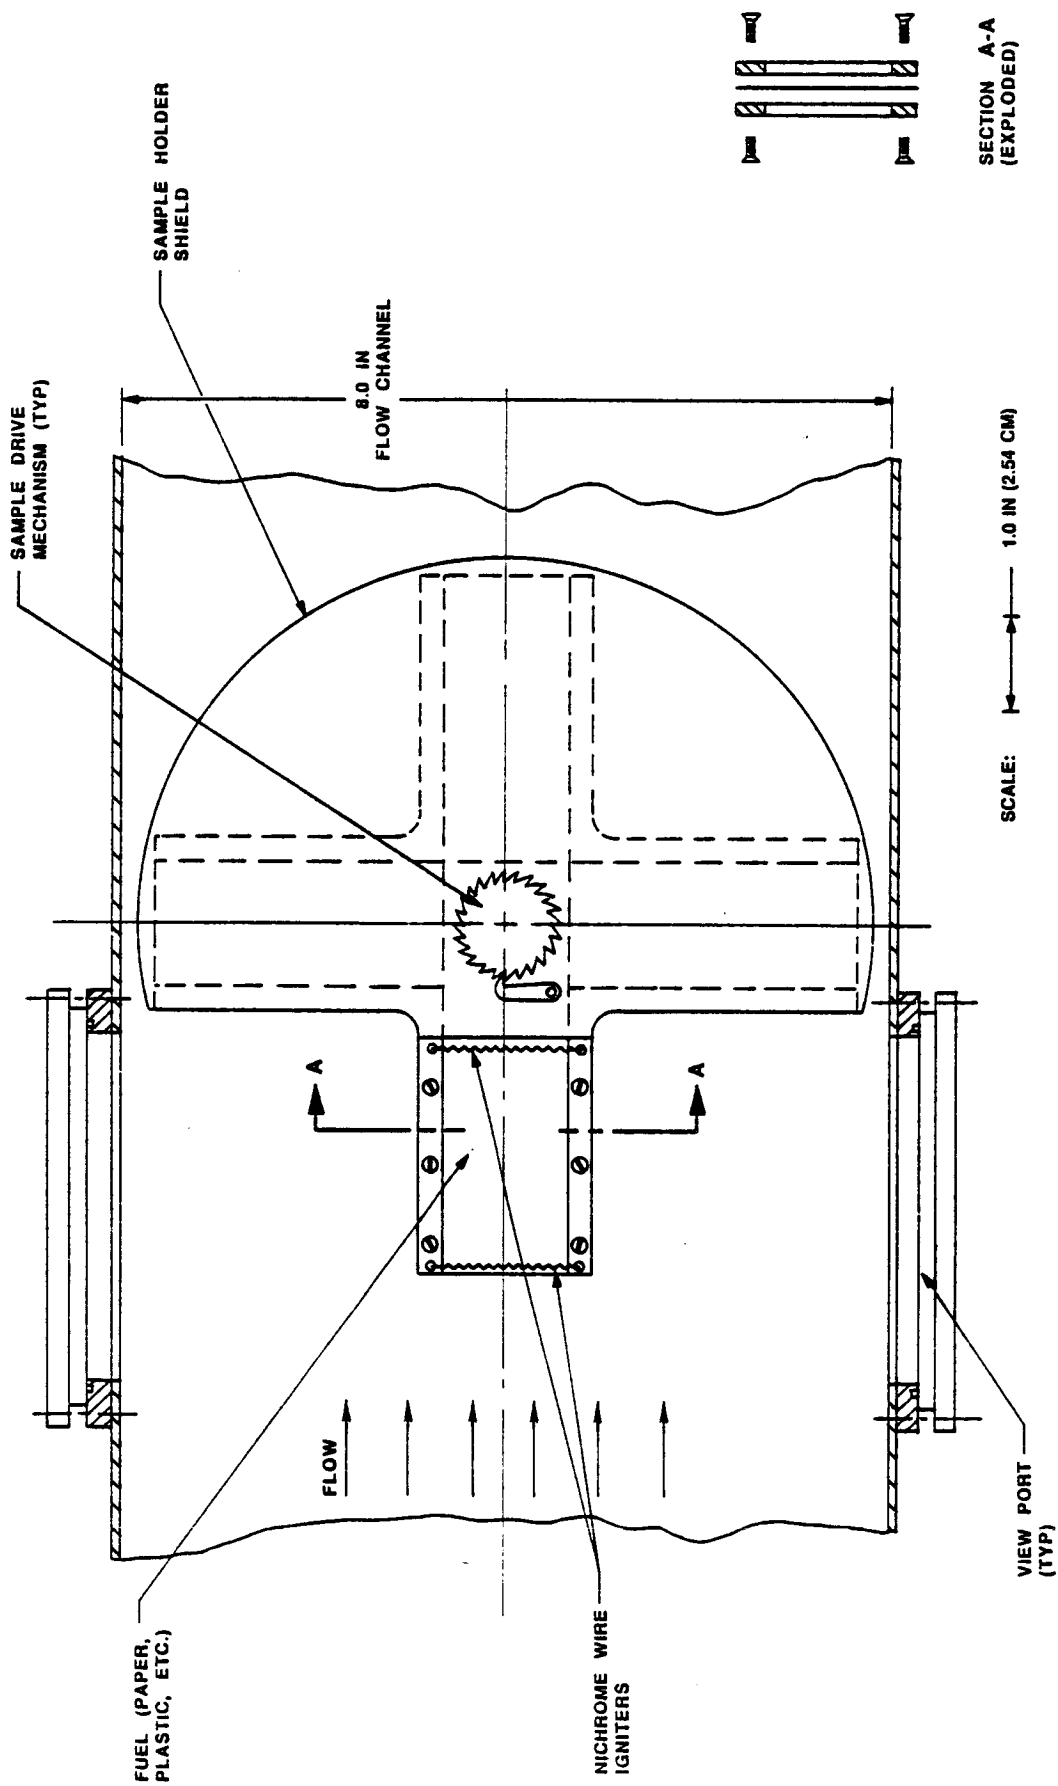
CONCEPT 3 - ROTATING WHEEL TYPE SAMPLE HOLDER
